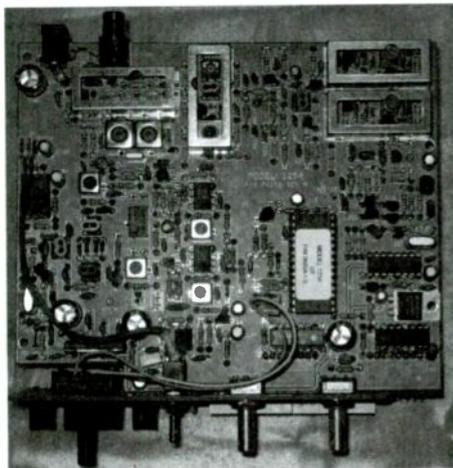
Completed main PCB mated to display PCB prior to mechanical assembly
